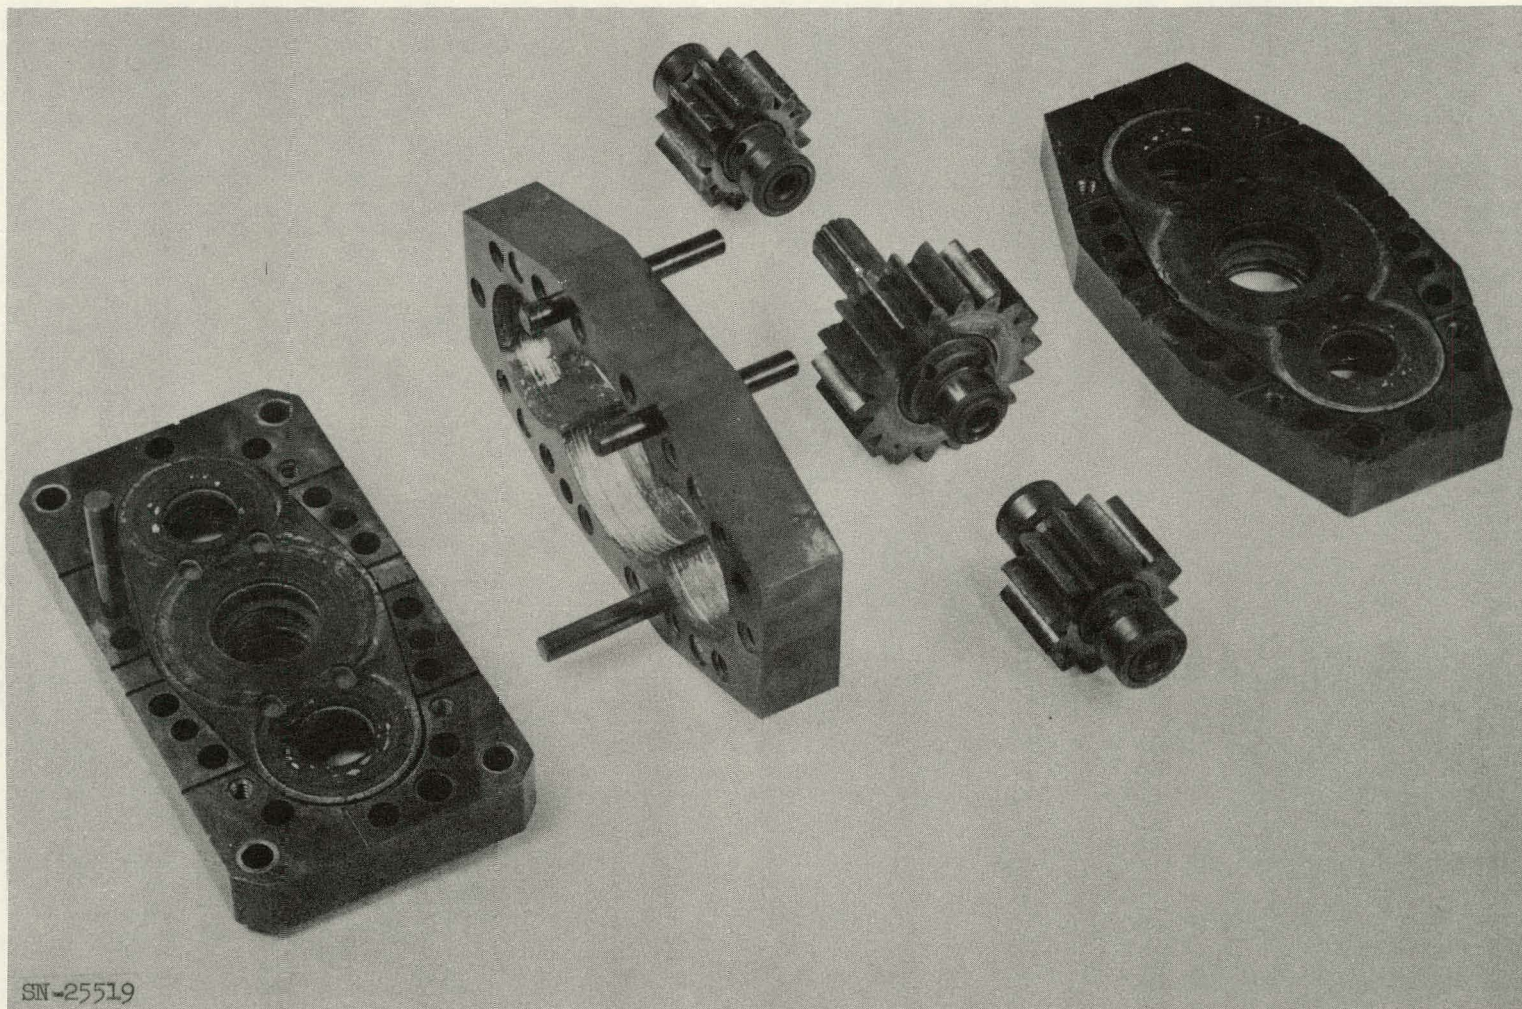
Exploded view of Model 1240 motor following high-temperature tests.
